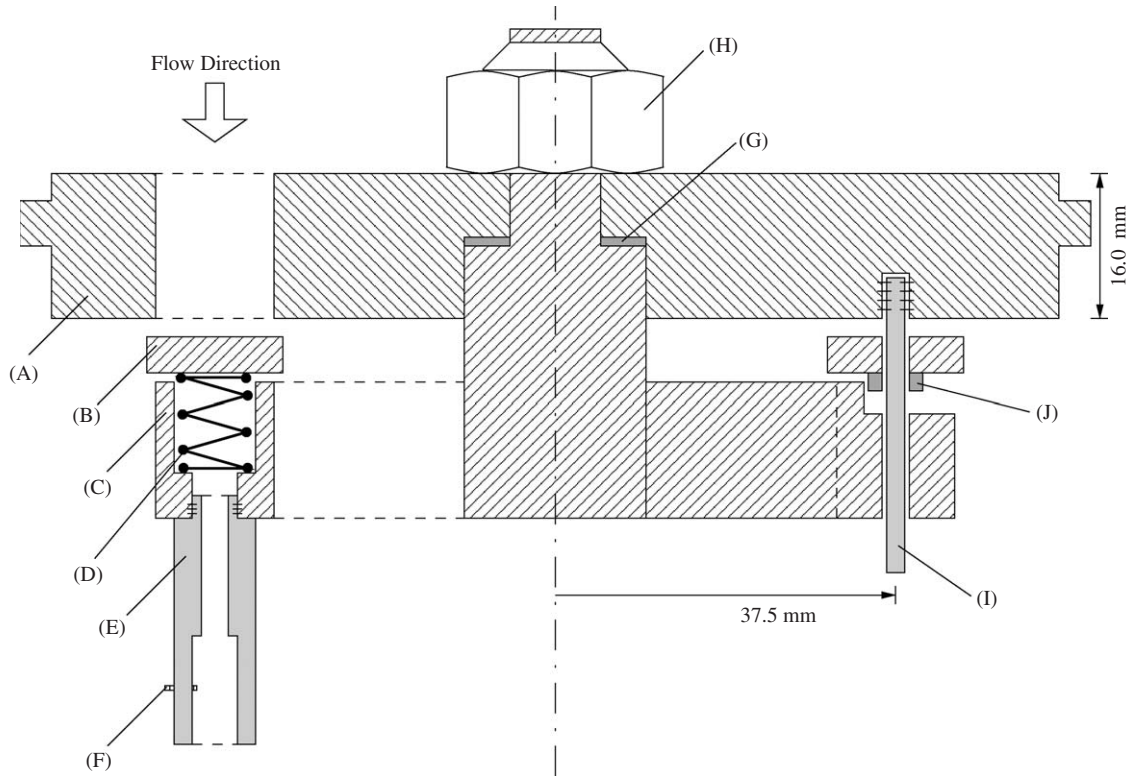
Model valve assembly (A: seat, B: ring plate, C: limiter, D: spring, E: glass-fibre connector, F: imbus screw to adjust the position of the glassfibre, G: high-tolerance ring to adjust the maximum valve opening, H: locking nut, I: guiding rod, J: nylon tube connected to the plate).
